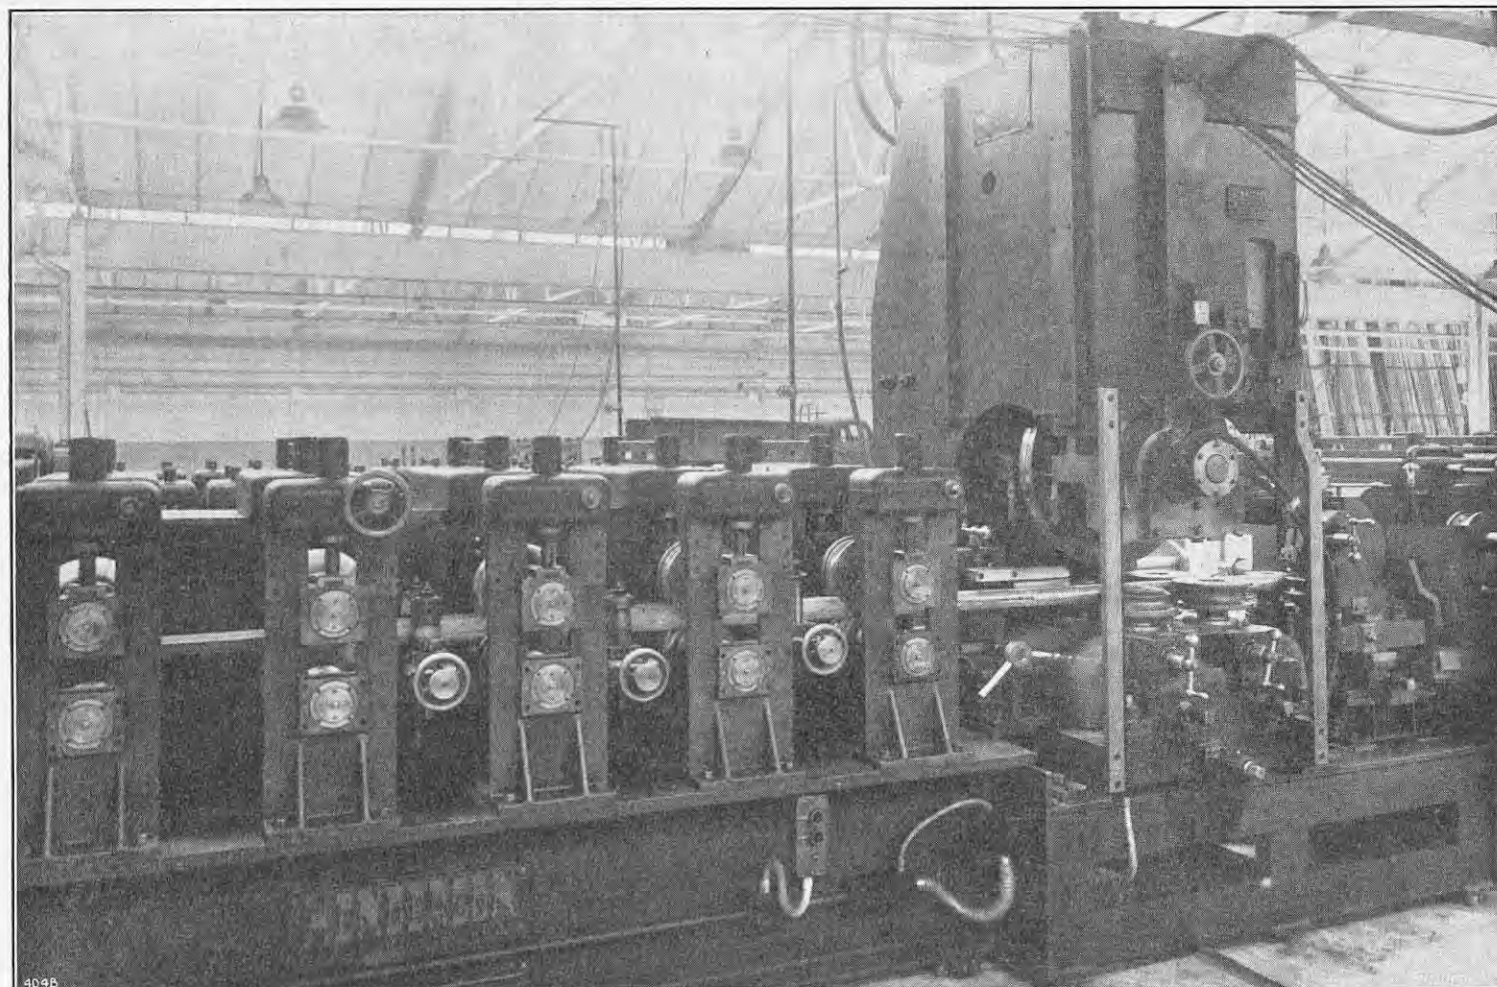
DRIVE ROLLS AND WELDING HEAD.
